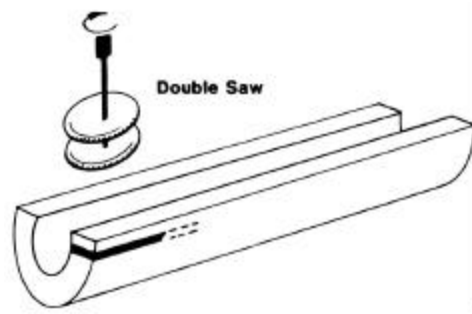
Double saw assembly for longitudinal strip specimen preparation [2].
